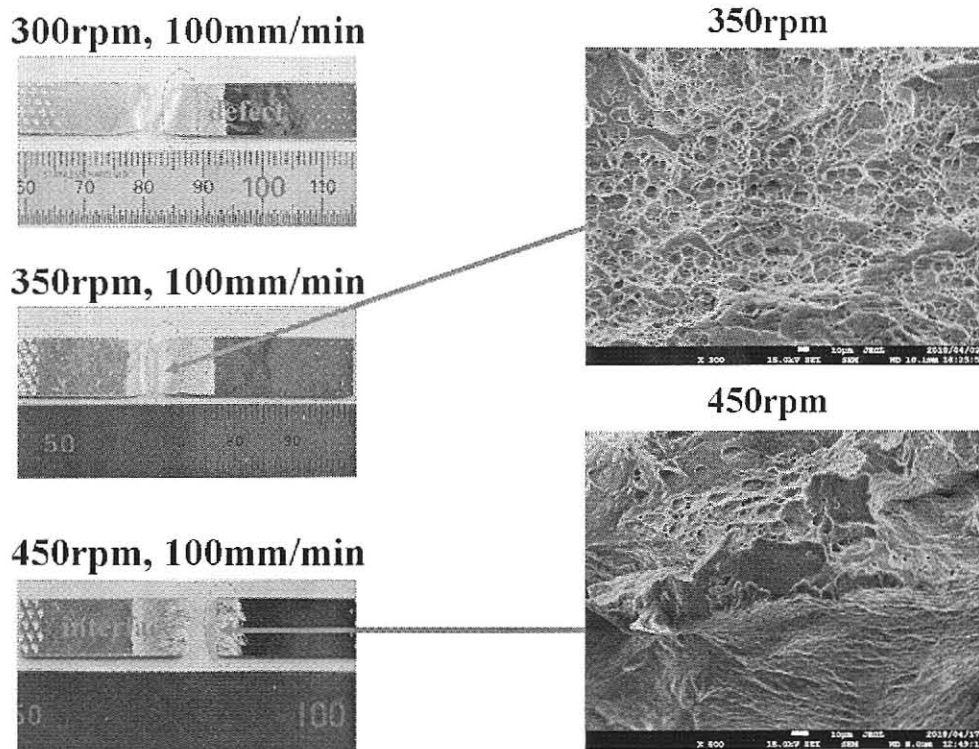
Appearance of BMG /Al FSW joints after tensile tests and SEM images of tensile fracture surfaces.
